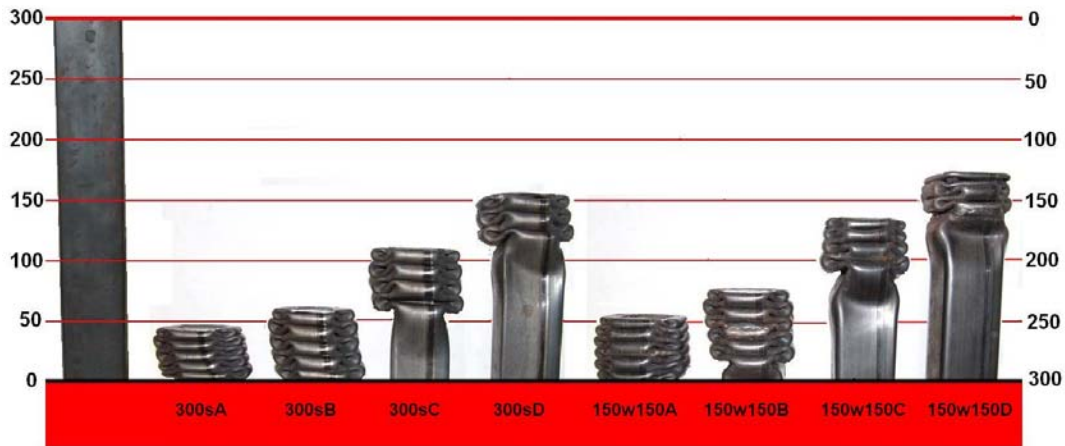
Progressive buckling of 300mm single tube specimens and welded equivalents at drop heights of 3.26m, 2.68m, 2.15m and 1.69m respectively.
